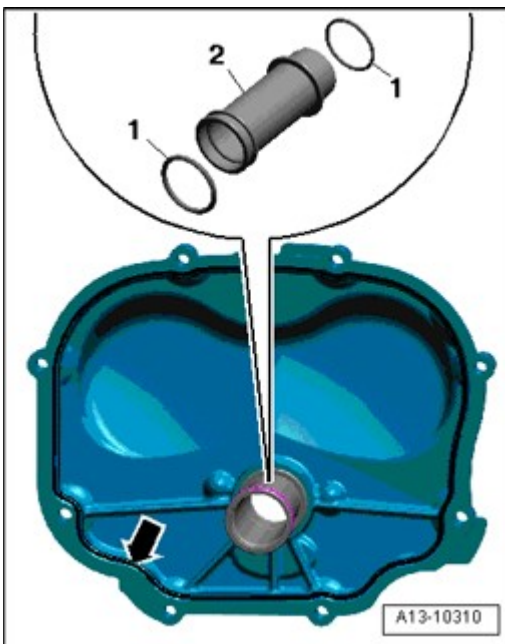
Identifying Timing Chain Cover, Coolant Intermediate Pipe, O-Rings, And Sealant Bead
